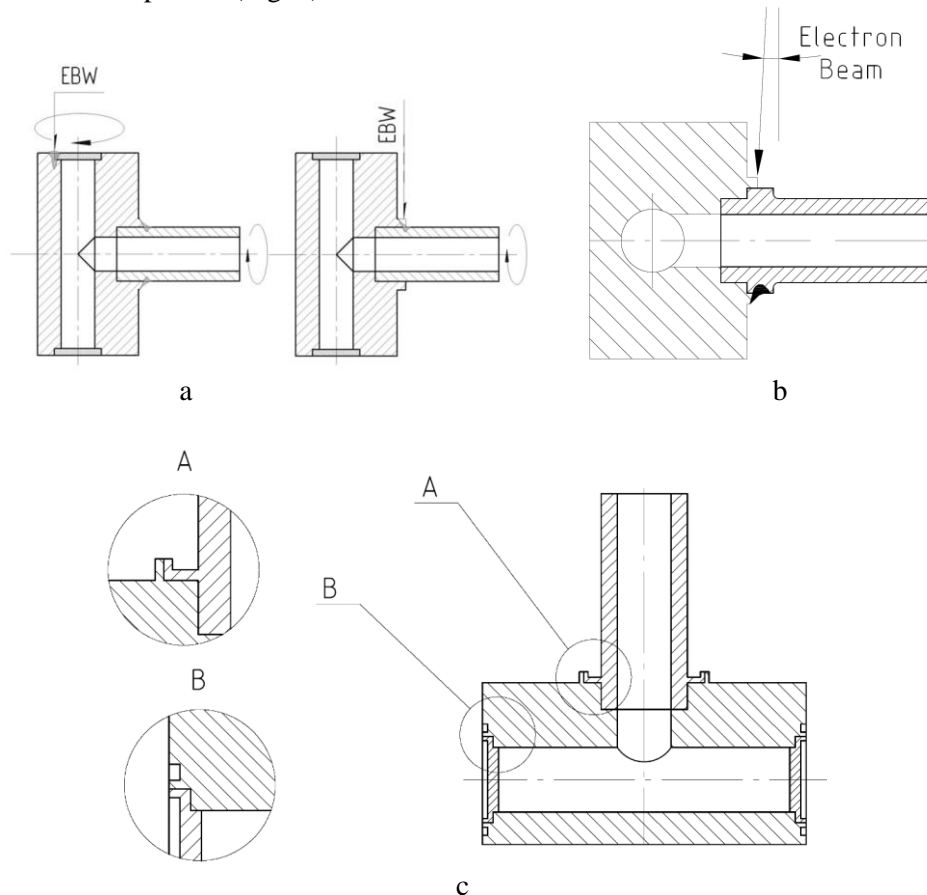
Three stages of modernization of the design of welded joints of the assembly: (a) welding of the nipple with the housing “in the lock” was replaced by a scheme with a ‘collar’ fused to the nipple wall, the housing with plugs - “in the lock”, (b) the nipple was modified for welding with an inclined electron beam, (c) modernization of the joints of fittings in the form of flanging the edges of the joint [9].
